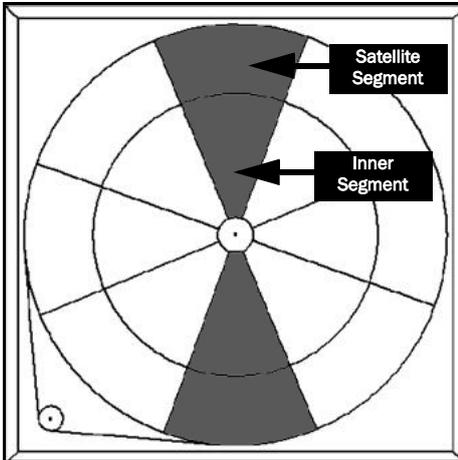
Remove or install opposing inner and satellite segments to minimize wheel imbalance.
